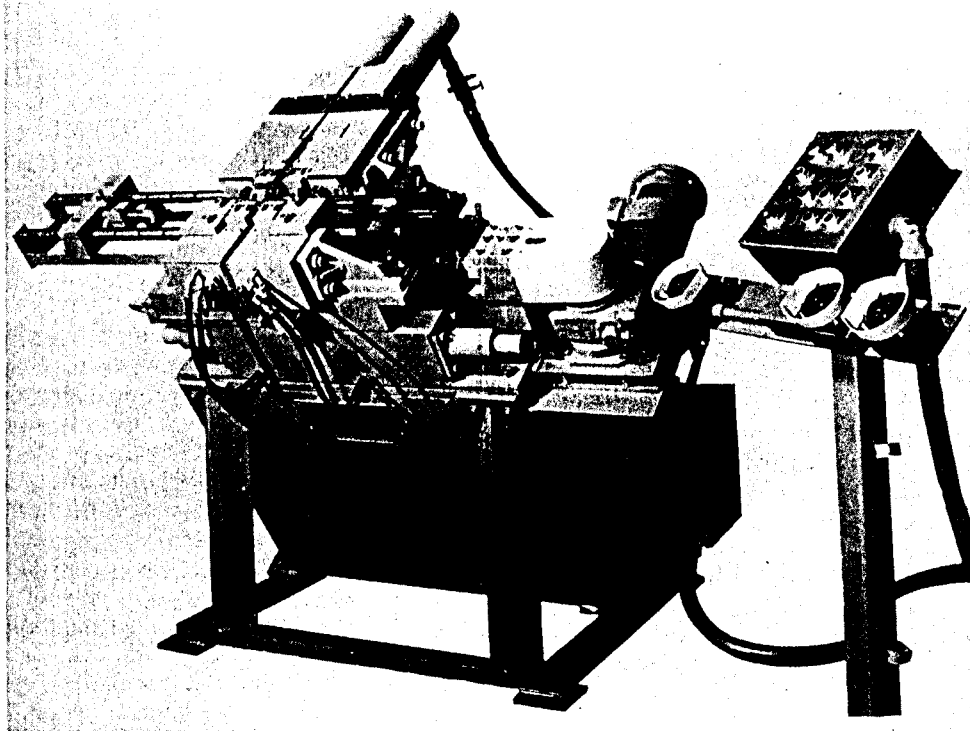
Automatic Motor-Operated Flash Welding Machine
